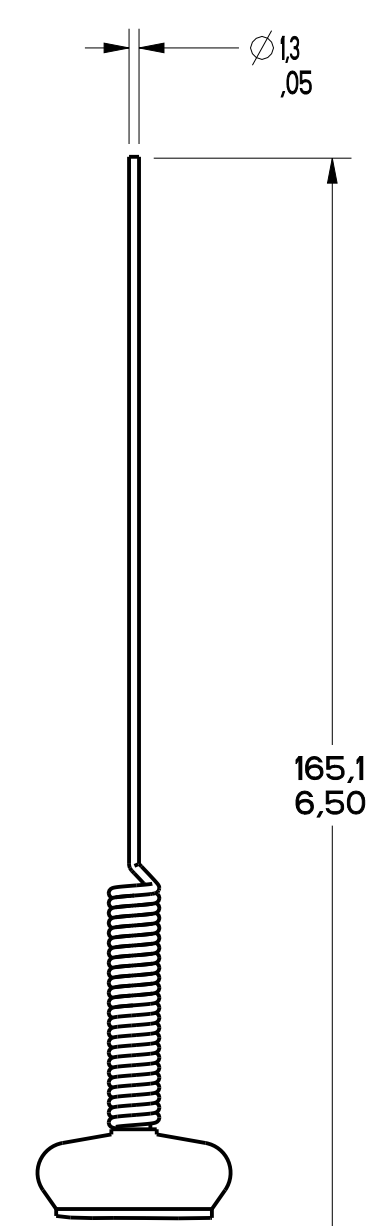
B - WOBBLE HEAD, STAINLESS STEEL SPRING ACTUATOR, OTHERWISE SAME AS FIGURE 7
